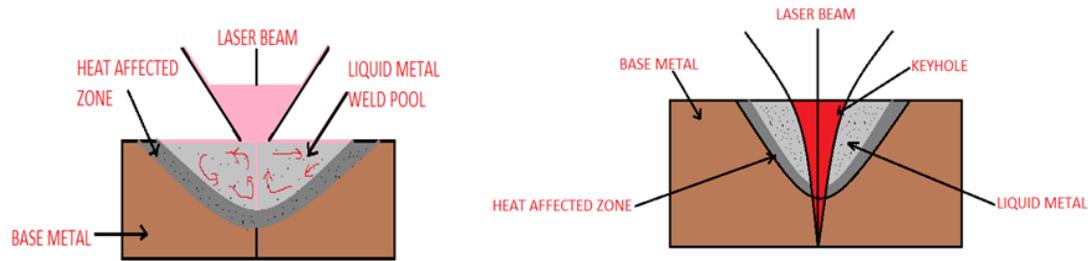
Schematic view of conduction melt pool (left), and deep penetration welding mode (right). The surface boiling and marangoni effect are more in conduction laser welding (adapted from [10]).
